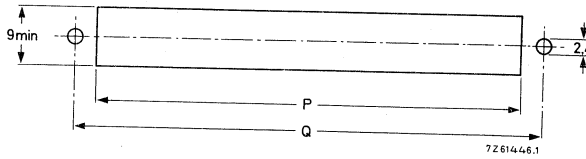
Hole pattern for panel mounting of male parts; see Table 4 for dimensions P and Q.
